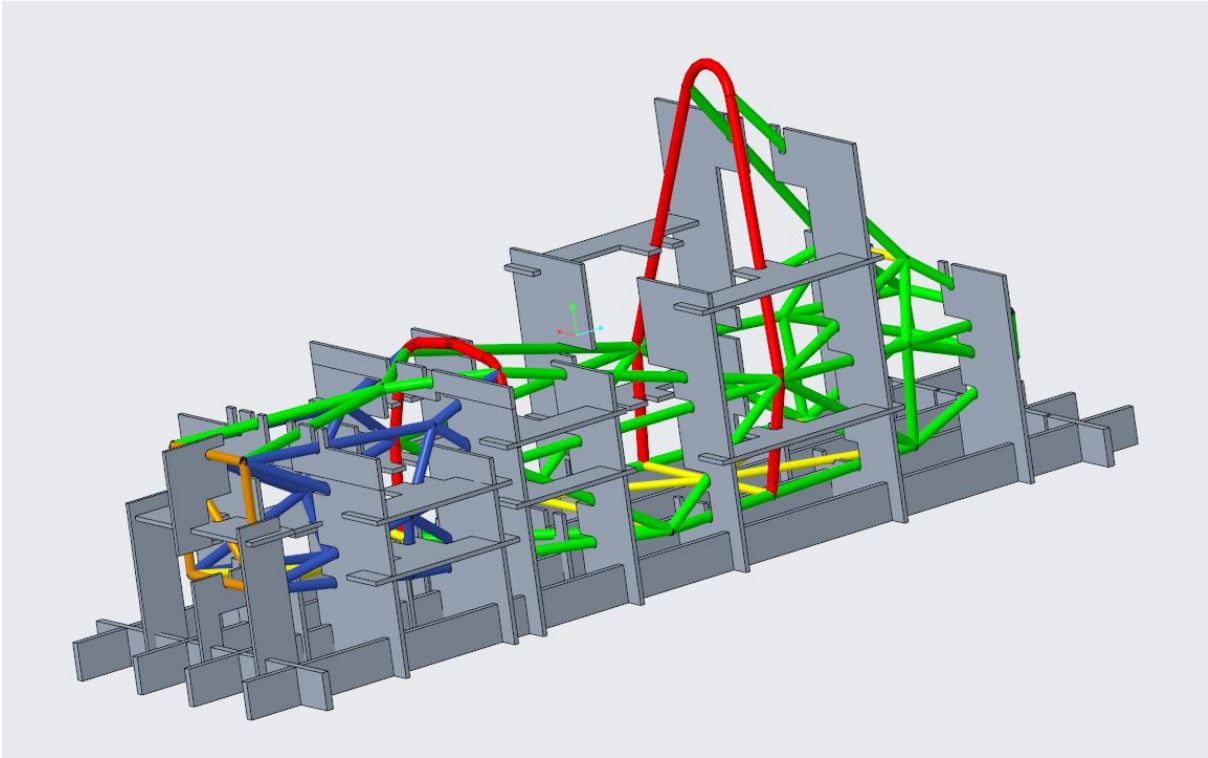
Figure showing the result of the automatic jig builder based on the wireframe of a complete frame design.
